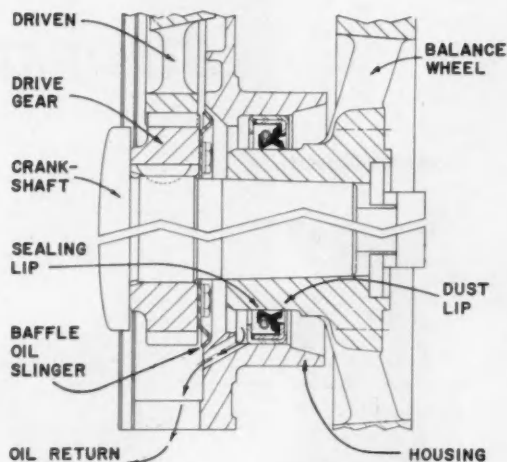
Front crankshaft oil seal of polyacrylic rubber, replacing a leather seal in a diesel truck engine, examples the new materials and methods being used in modern seals.
